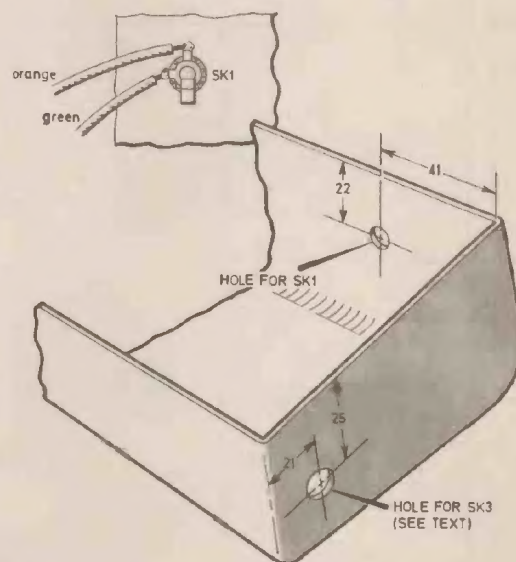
Case drilling details. Locate p.c.b. assembly and check alignment of output socket SK2 before drilling hole for aerial lead connector.
